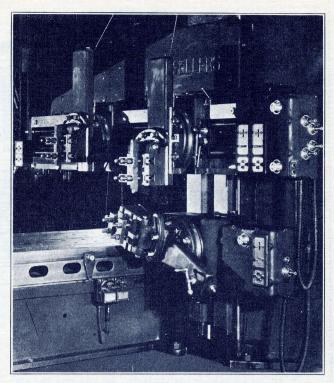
"Stearns High Duty" Magr planer—the largest of its kind ever built "Stearns High Duty" Magnetic Clutches control this
